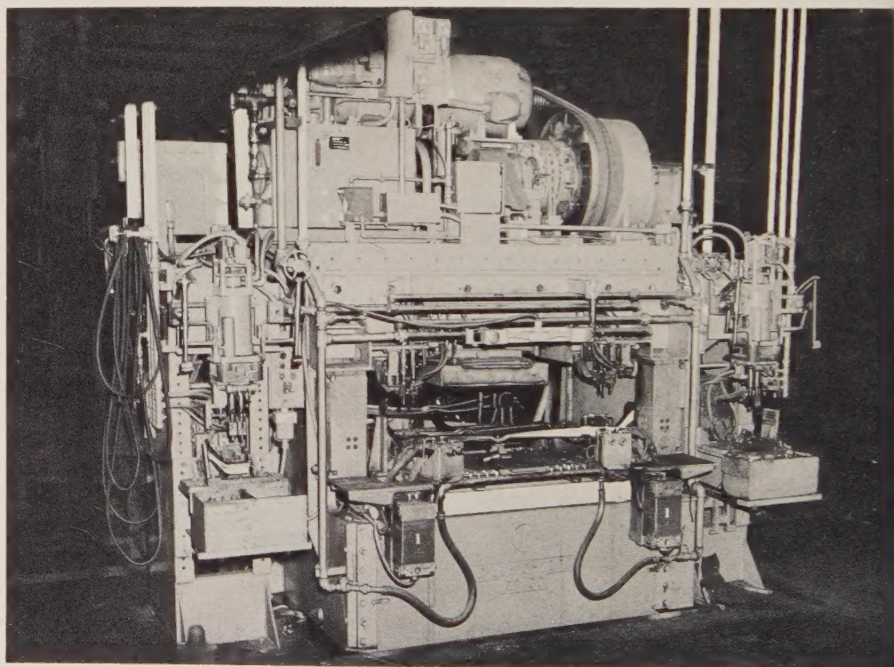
This hydraulically operated press welder represents but one example of where a non-flammable liquid was successfully substituted for a flammable, petroleum-base hydraulic fluid. Many factors had to be considered, however, before a non-flammable liquid could be substituted. Typical of the properties required for the non-flammable liquid used were, in addition to its non-flammable characteristics, its toxicity, lubricating quality, viscosity, compressibility, specific gravity, stability, and foaming action. It was highly important that the substitute non-flammable liquid have essentially the same characteristics as the flammable hydraulic fluid it was to replace in order that satisfactory machine operation be maintained. The basic types of non-flammable liquids available as substitutes for hydraulic systems at present are oil-in-water emulsions, water-base solutions, and organic liquids, such as phosphate esters and chlorinated products.
